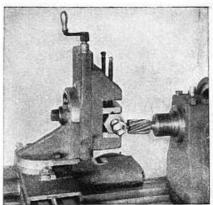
Milling a Hexagon Head Bolt on the 9-inch Lathe
